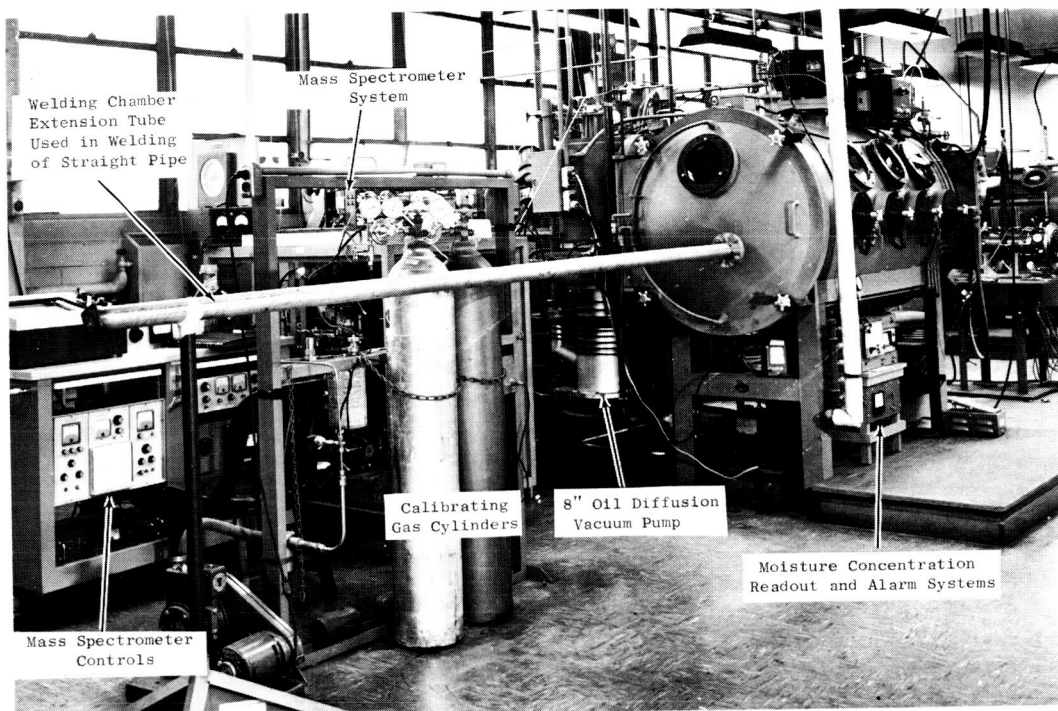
Vacuum-purge inert gas welding chamber (3-ft diam by 6-ft long) with helium supply and purity control system showing pipe welding extension tube attached to chamber door.
